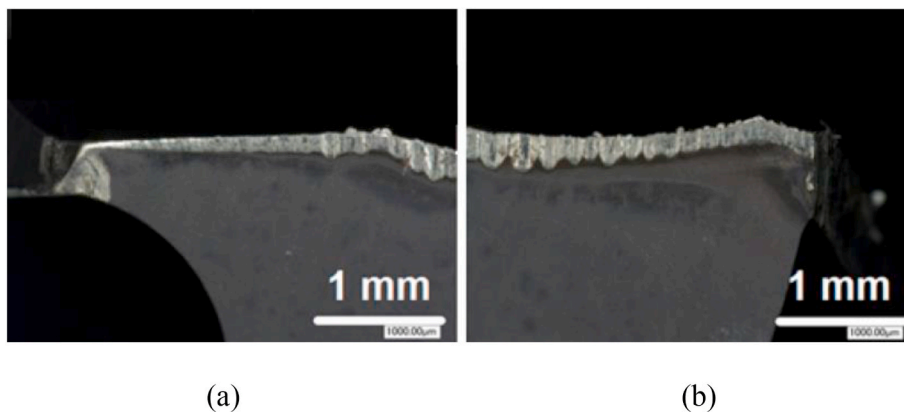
Flank face of the worn drill (MWF; VB = 0.256 mm) showing the a) chisel edge and the straight part of the cutting edge, b) curved cutting edge and drill periphery.
